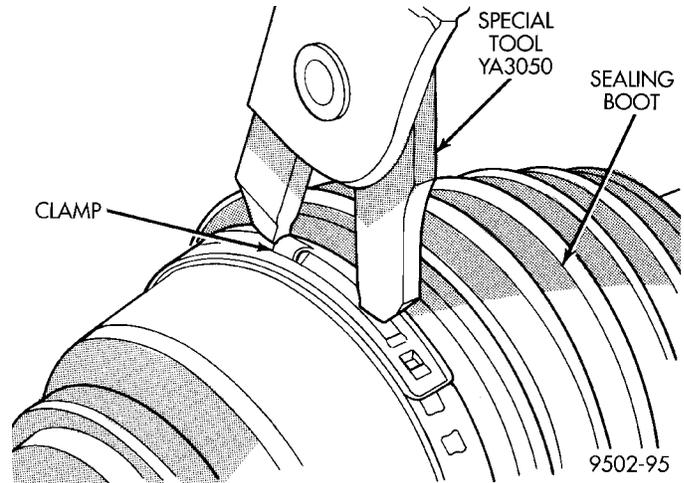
Clamping Tool Installed on Sealing Boot Clamp
